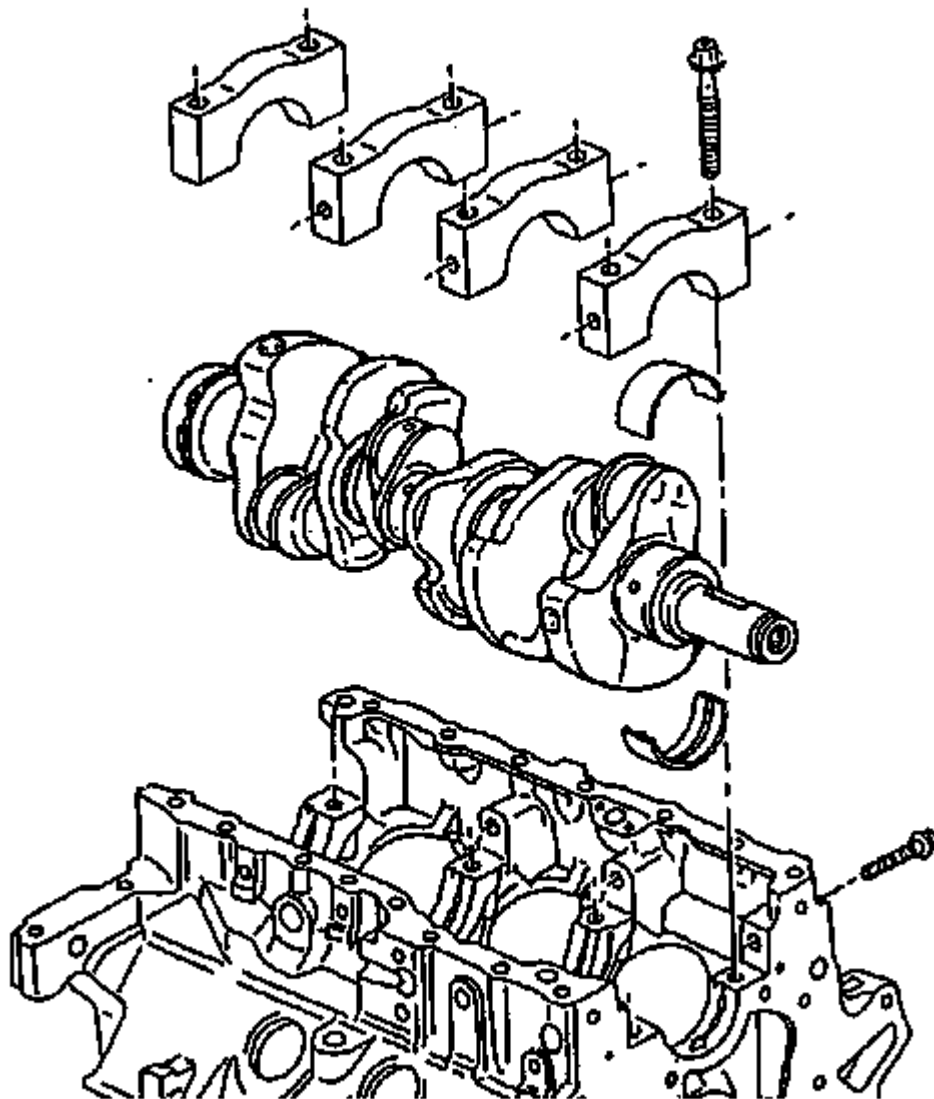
View Of Crankshaft, Bearings And Bearing Caps
